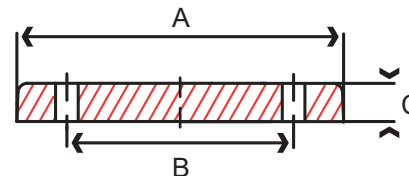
HB1 – 125 lb. Blind Hydrant Flange
